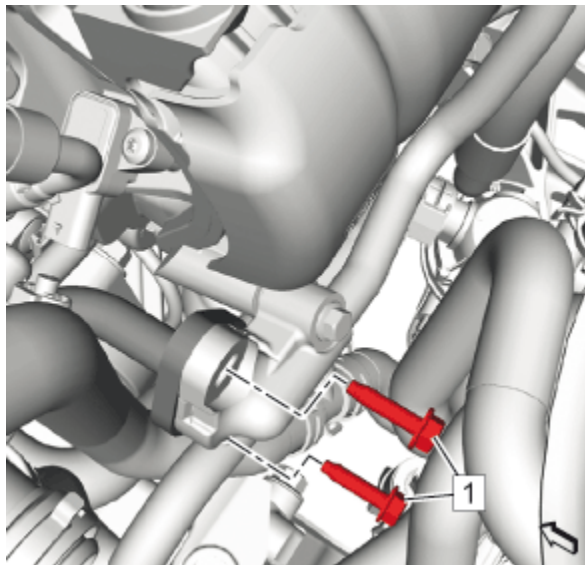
Exhaust Gas Recirculation Pipe Bolts
